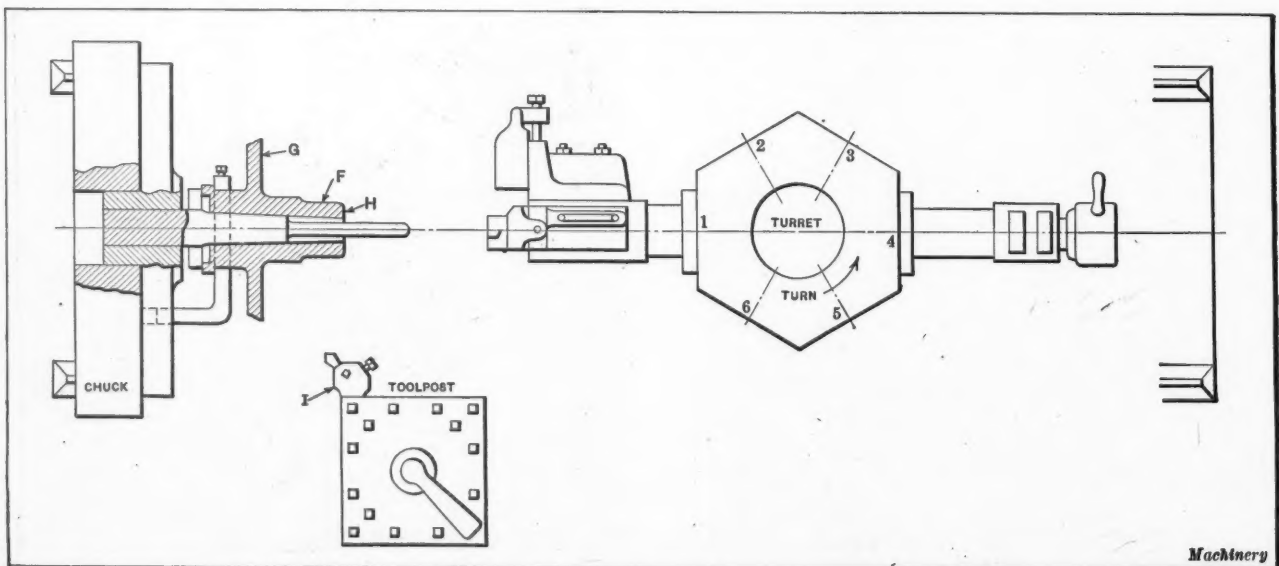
Tooling Equipment for Second Operation on Wheel Hub
